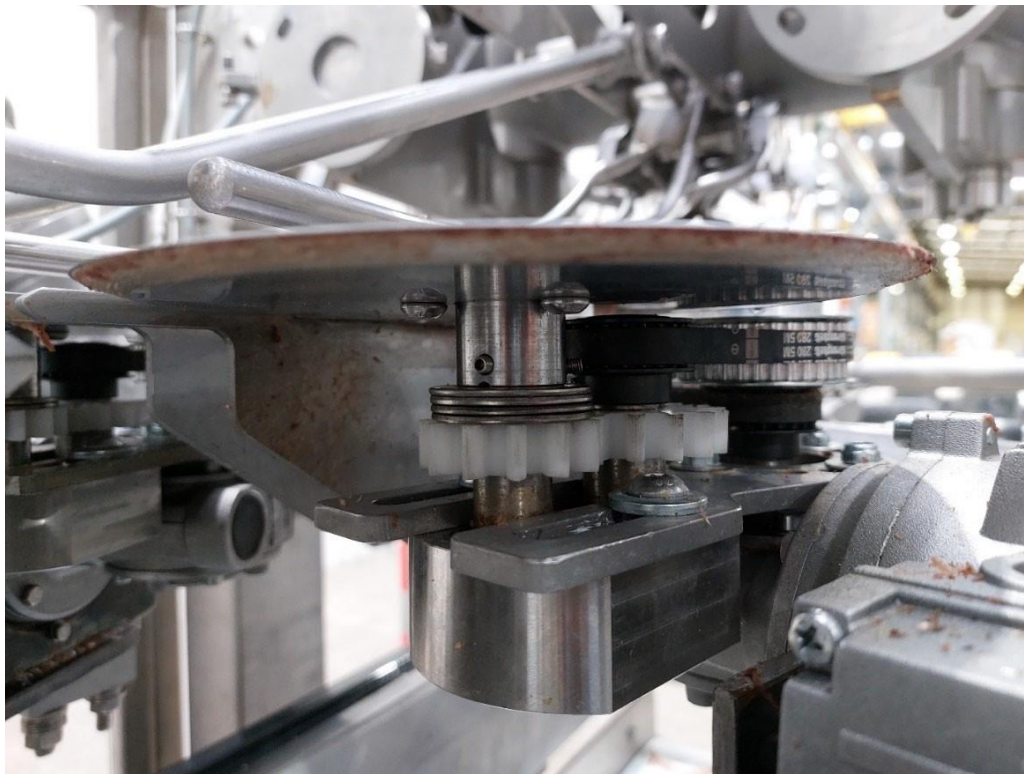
Prototype TL powered wheel and counter rotating tail cutting mechanism
